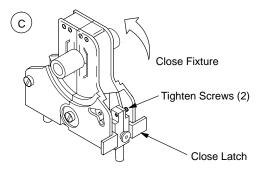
Aligning the Tubing in the Series 8 Micro Weld Head Fixture
